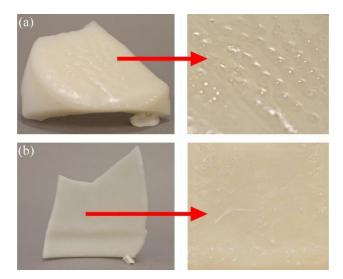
On the piece printed using resin, (a) marks caused by deformed FEP film and (b) scratches formed after removing support residues
